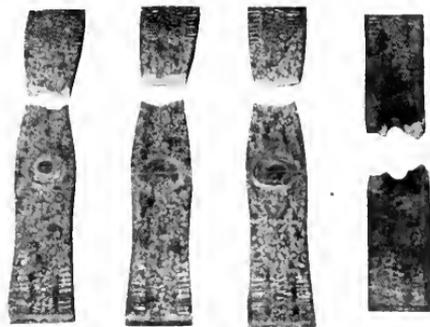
Plates shown in Fig. 4, after Pulling in the Testing Machine. Note that all welded plates broke outside the weld
